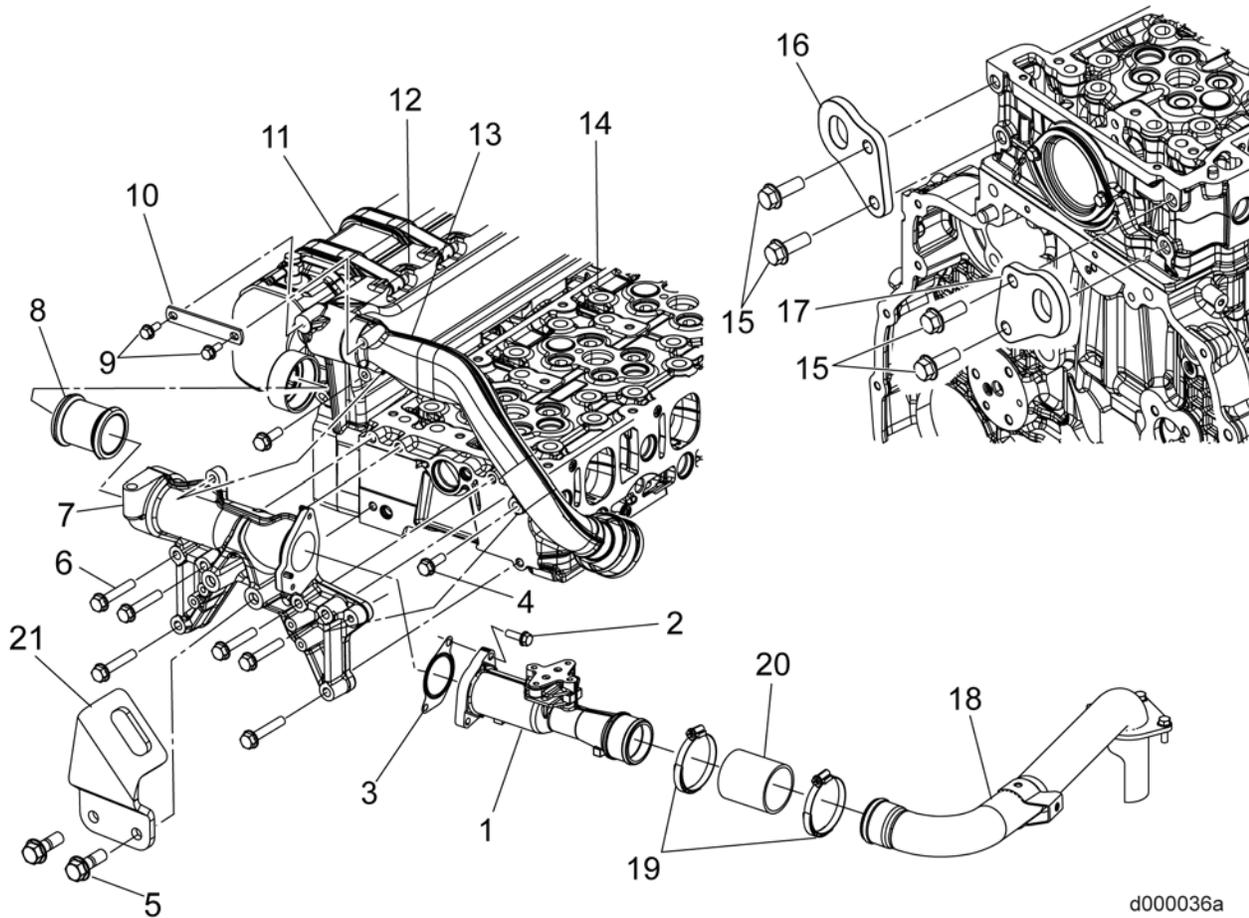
DD13 EPA10 Lifting Bracket Locations
